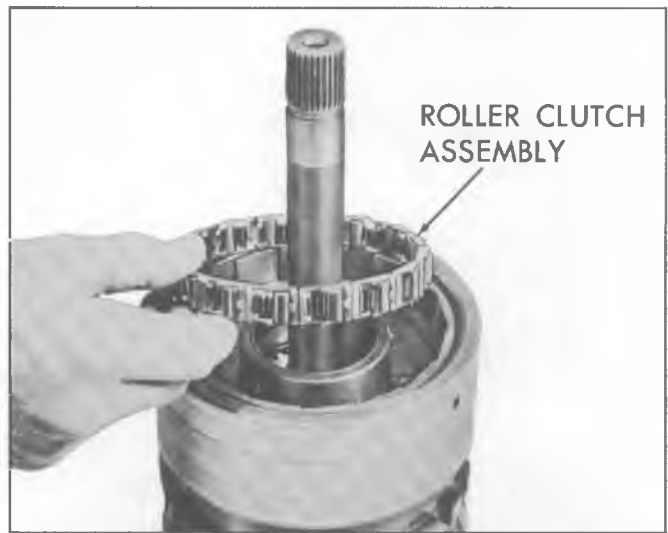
T—Installing Roller Clutch to Reaction Carrier
